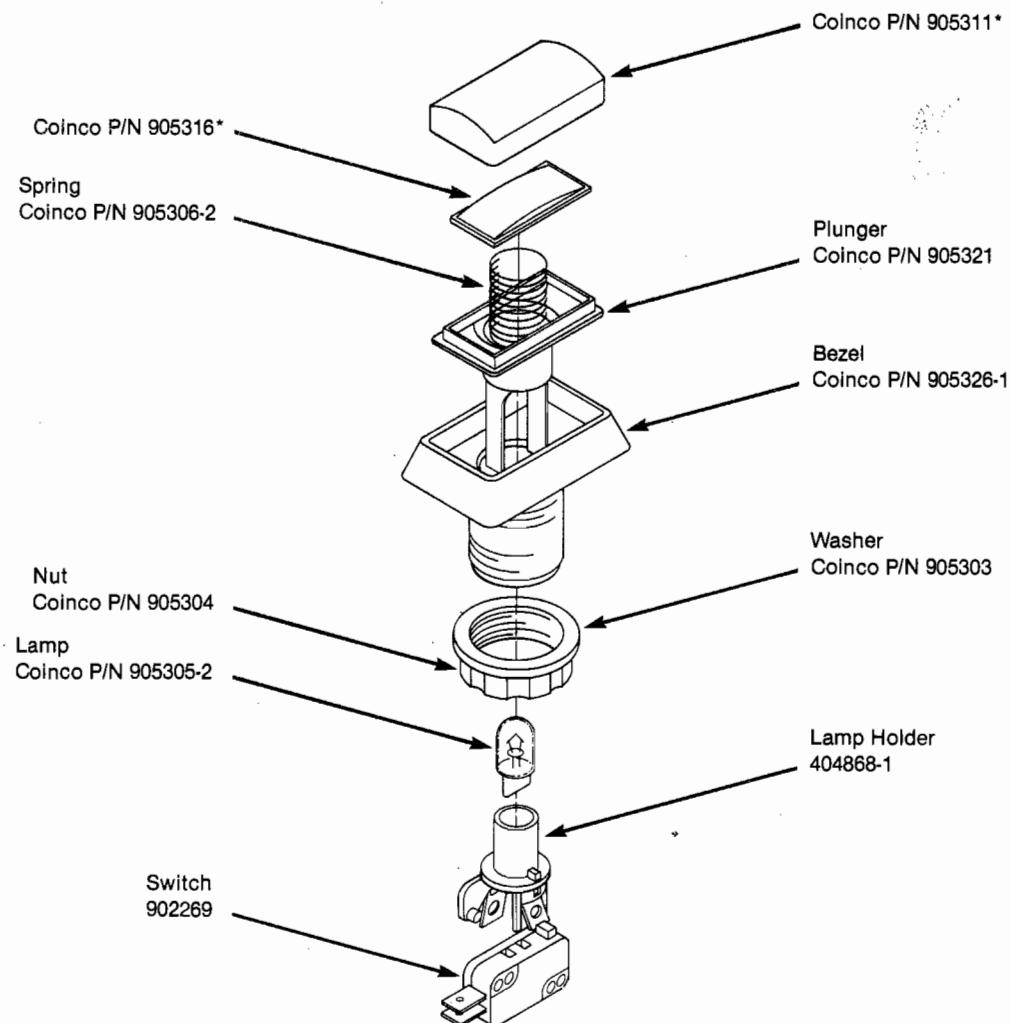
Switch Button Assembly (570-0042-XX*)
